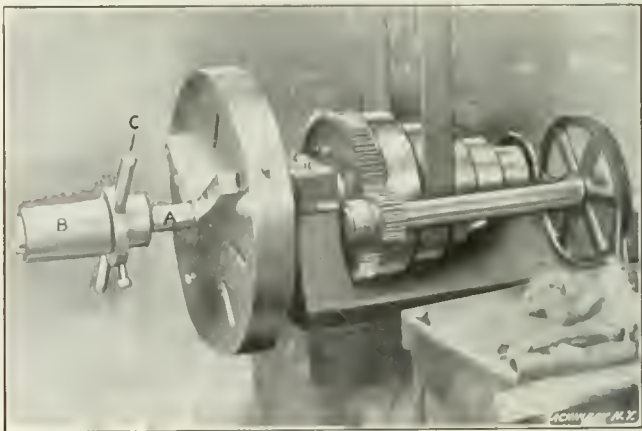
Cone Pulley Lathe Head and Chuck used for Reaming
